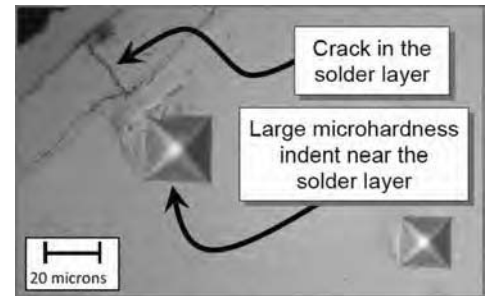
Micrograph illustrating the formation of a solder layer at the surface of a tool steel mold insert after multiple titanium alloy castings. Source: Ref 15
